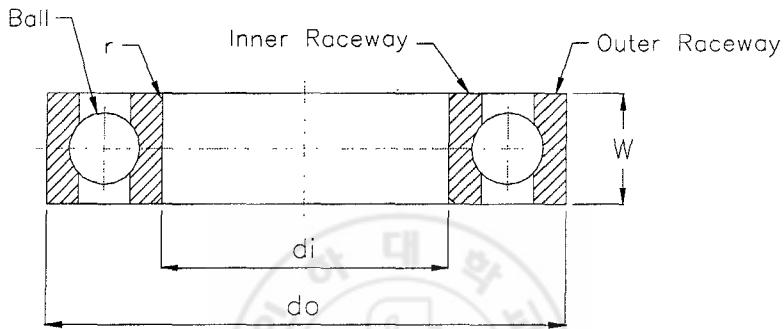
The configuration and cross-section of a deep groove ball bearing
